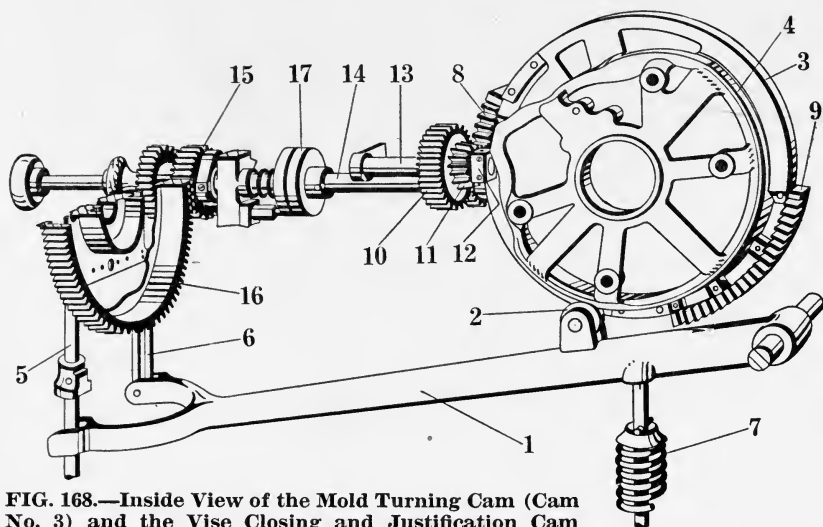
Inside View of the Mold Turning Cam (Cam No. 3) and the Vise Closing and Justification Cam (Cam No. 4). This cam has mounted upon its outer rim a short segment 8 and a long segment 9. Through the short segment 8 this cam turns the mold in the mold disk 16, one-quarter-revolution from normal to casting position, and by the long segment or rack 9, through three-quarters of a revolution from casting to ejecting position.
